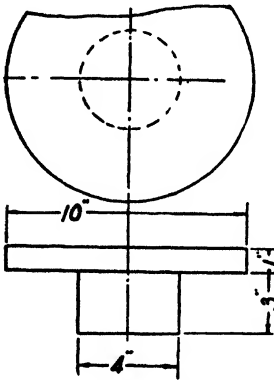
Finished or Machined Part, for Which a Casting Is to be Made.
